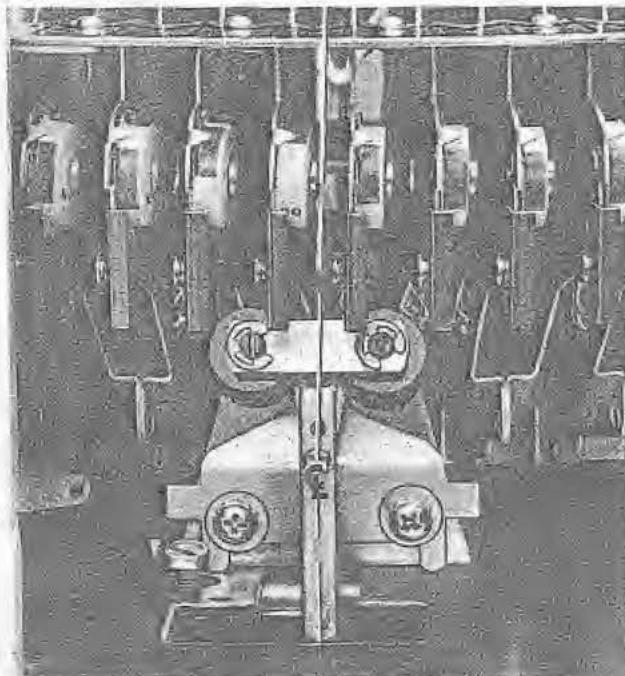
CENTER LINE FOR BACK STOP PAWL SETTING
